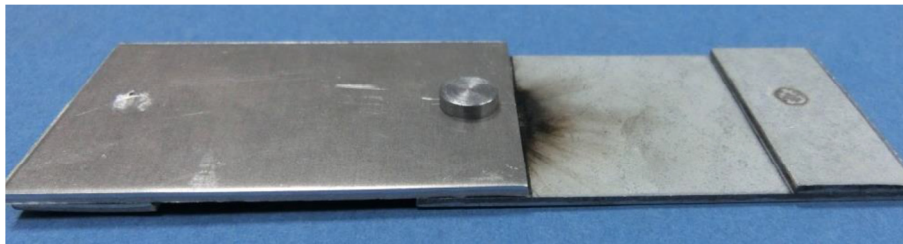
Arc element weld of aluminium to steel (Source: SLV)
